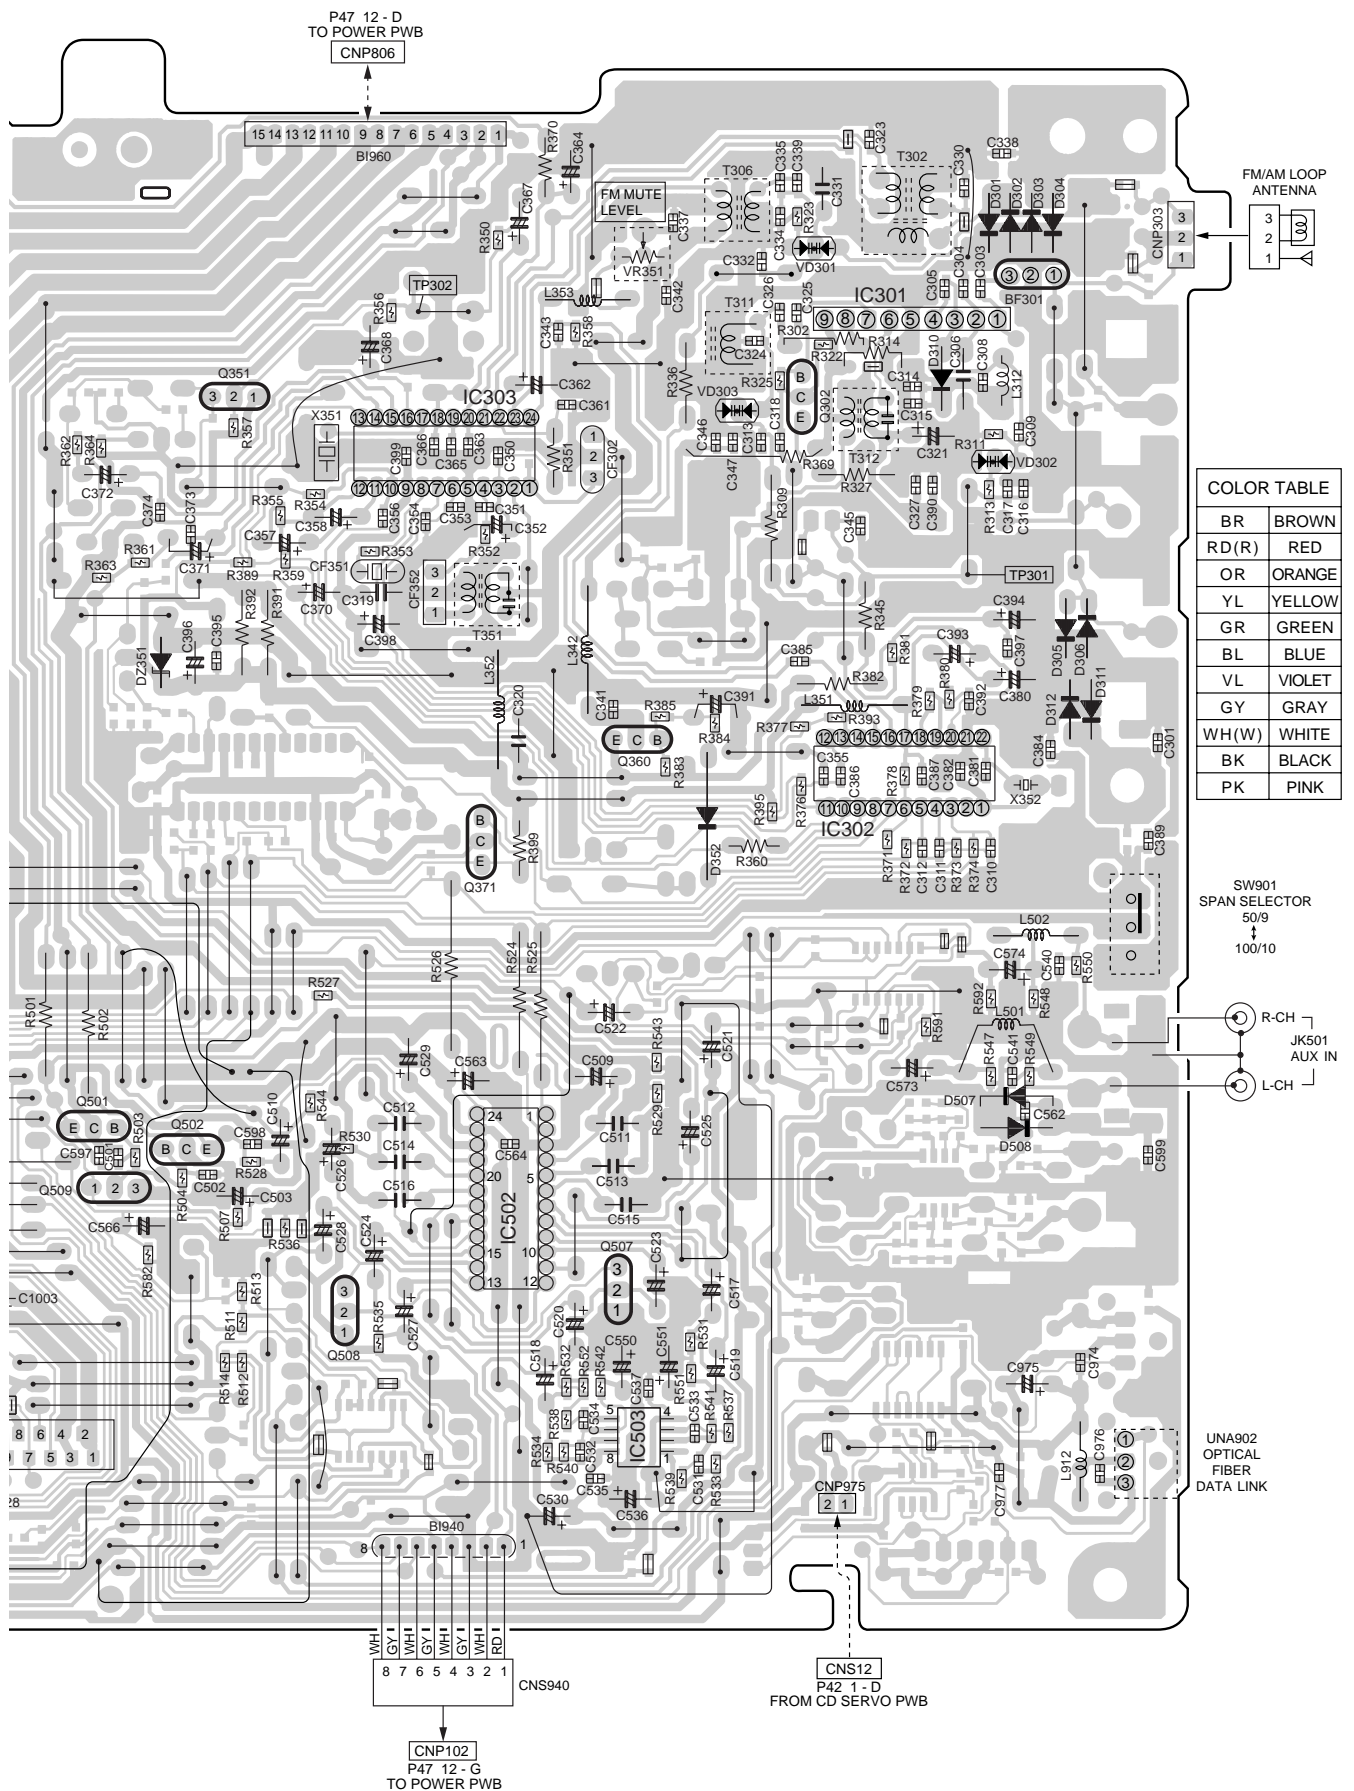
WIRING SIDE OF P.W.BOARD (4/13)
